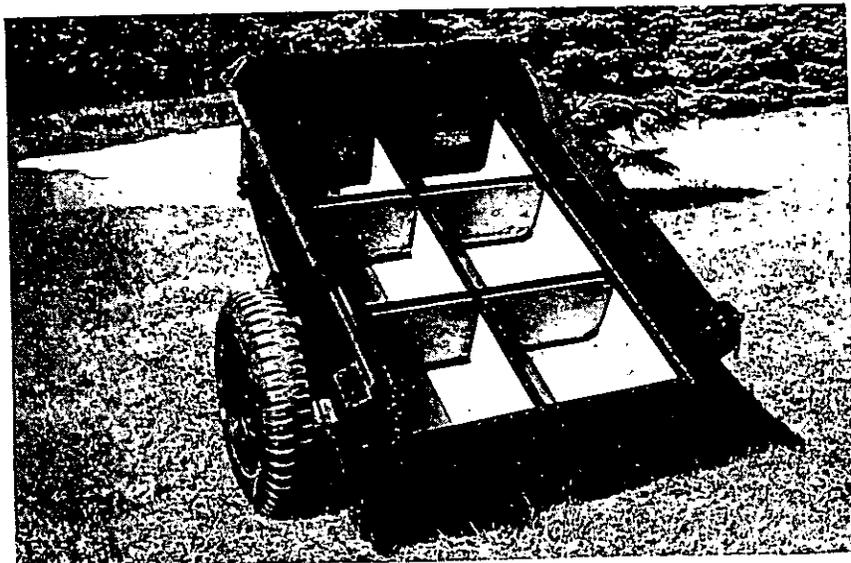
The original trailer box is easily converted. The baffle plates contribute to improved travel characteristics, especially in the absence of springs. The tapped holes for attaching the cover plate are all located in the top surface of the angles. By removing the top plate the interior is easily accessible for repair, refinishing, or cleaning.
